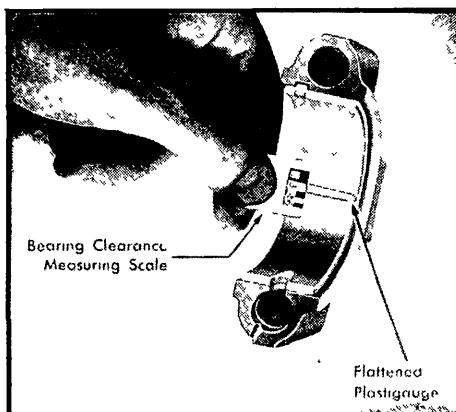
Checking bearing clearance with Plastigag, 1935-52
